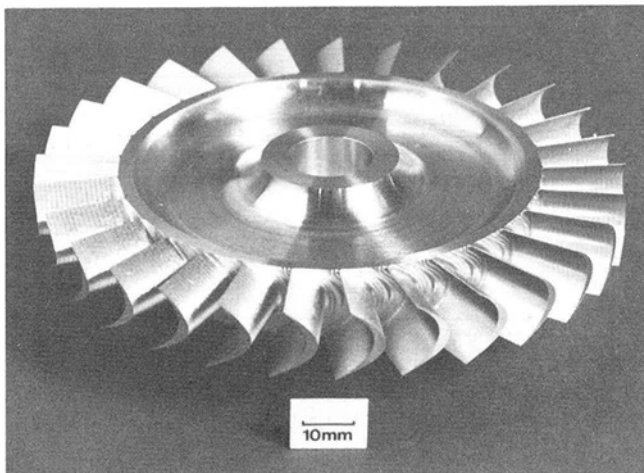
Photograph of 0.17 scale test axial turbobrake rotor
